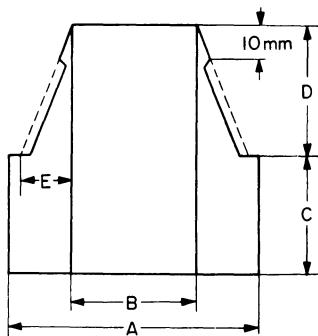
Stainless steel feather-edge cylindrical Housekeeper seal (Table 2.36). After Benbenek¹⁰⁶ (*Courtesy of The American Institute of Physics*)
